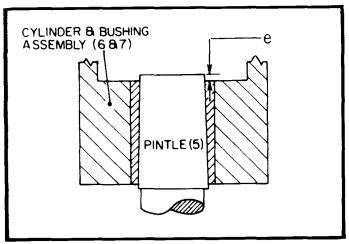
Basic "e" Dimension (Cylinder "tight" Position). (508644)
